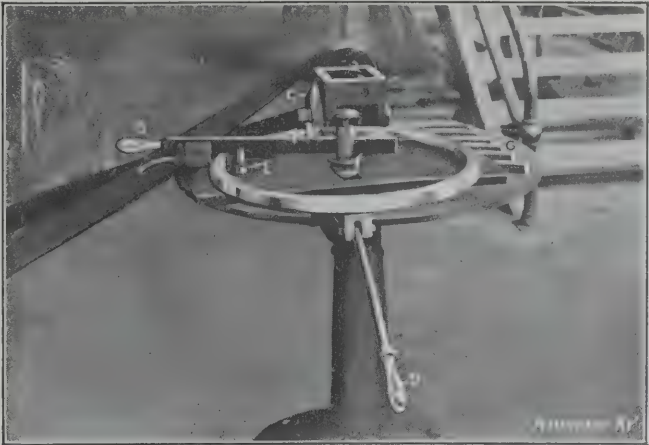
Special Machine for Dividing and Cutting Packing Rings into Equal Segments
